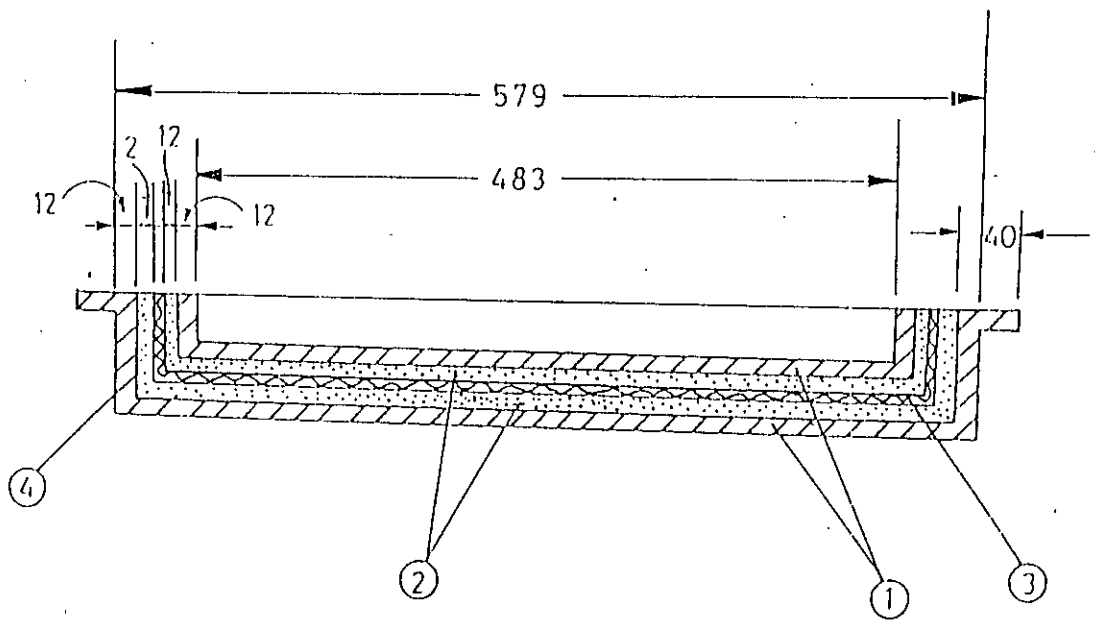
DETAILS OF HOT PLATE ASSEMBLY.
